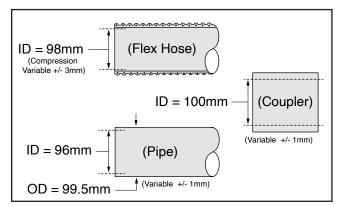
Clear pipe, flex hose, and coupler dimensions.
